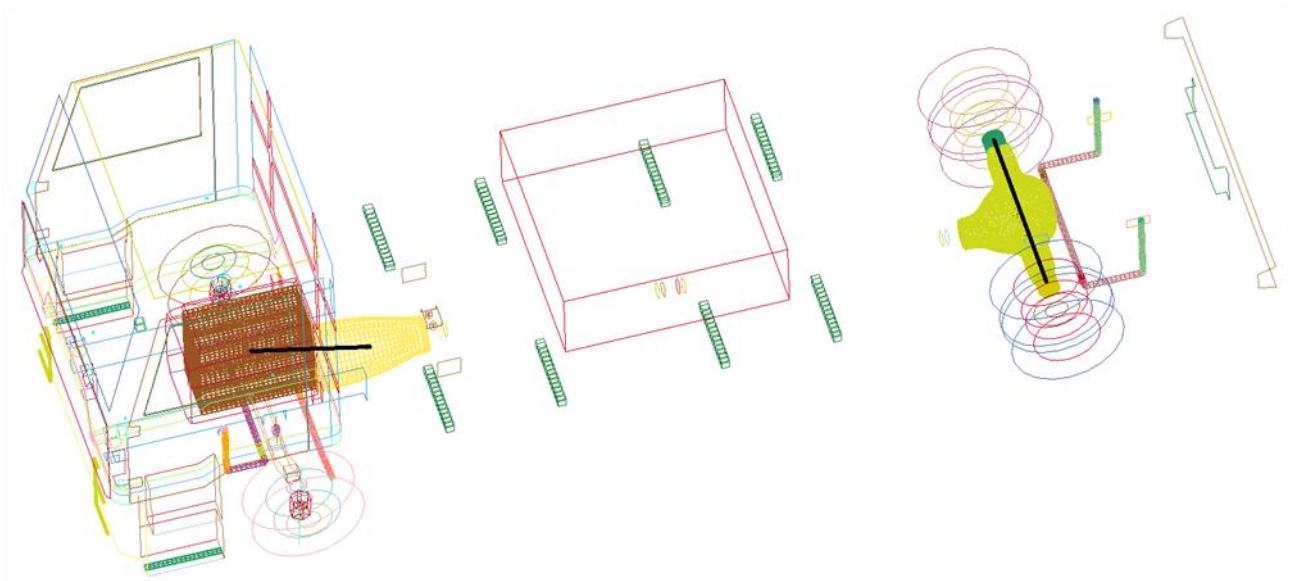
Rigid connections between engine and gearbox; rear axle and hubs of the rear wheels
